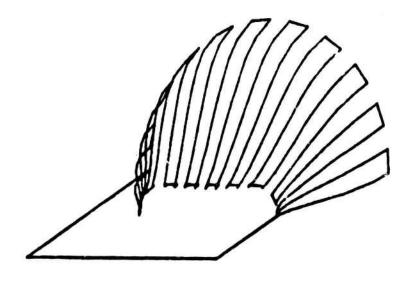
CUTTER PATH IN NC MACHINING OF EDM ELECTRODE
